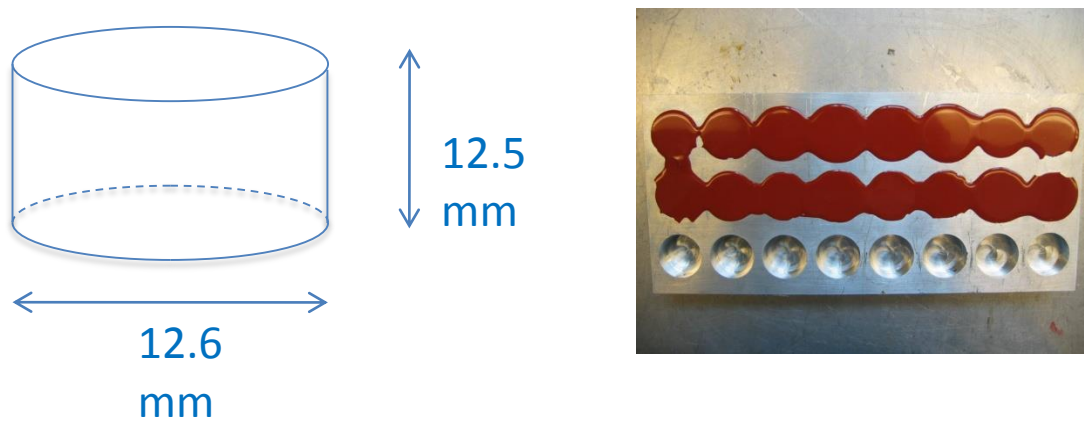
Compression test specimen and the mould to produce the specimens.
